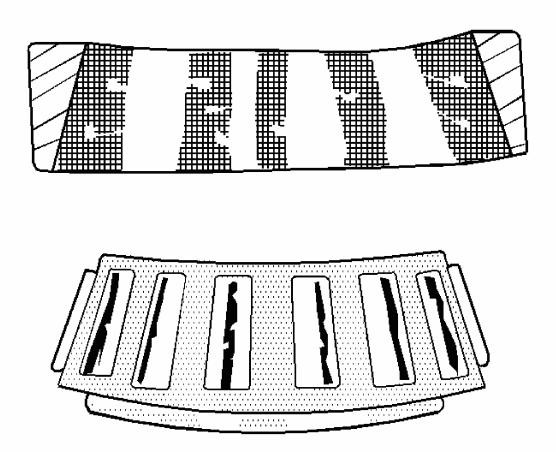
Inspecting Bearing Rollers & Races For Heat Discoloration Courtesy of GENERAL MOTORS CORP.
